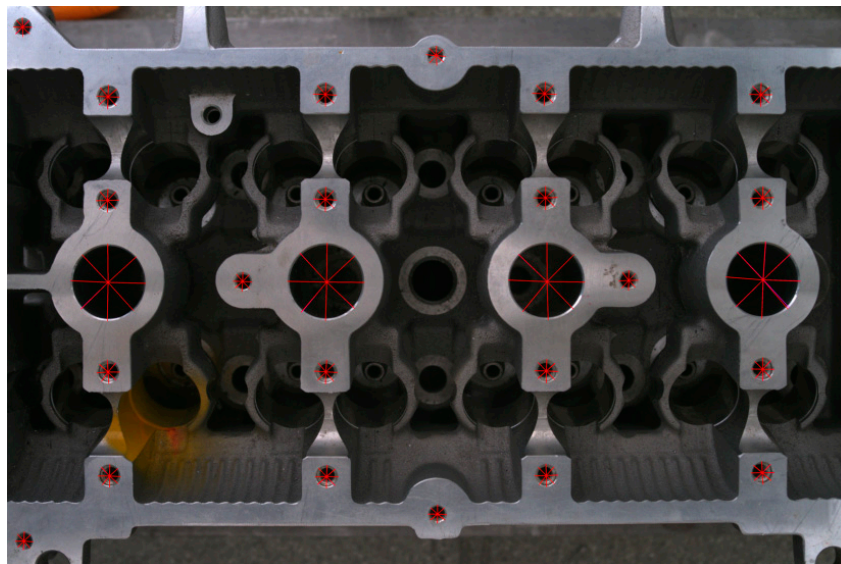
Matching results of the circular holes on the surface of engine cylinder head.
